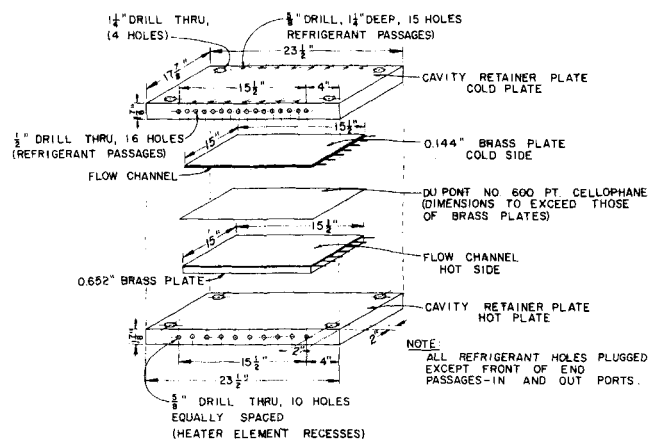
Exploded drawing of the horizontal thermal diffusion column assembly.
